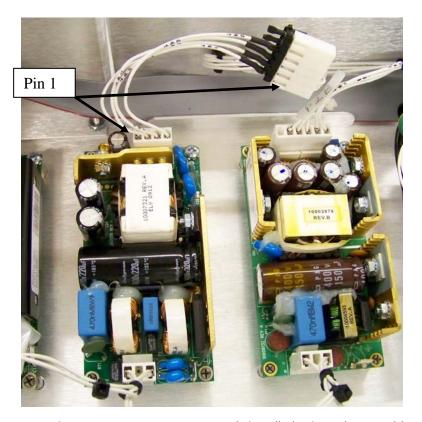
PA 12VDC Power Supply installed using adapter cable.
